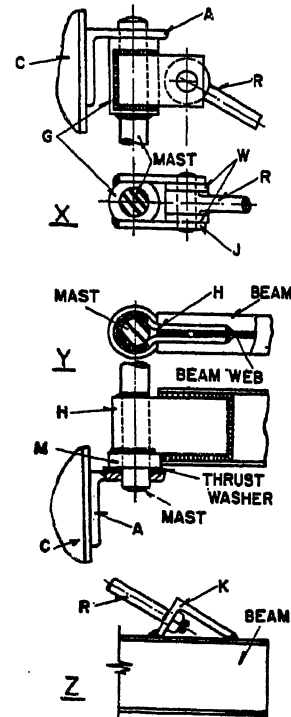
Alternate Construction for Arc Welded Jib Crane.
